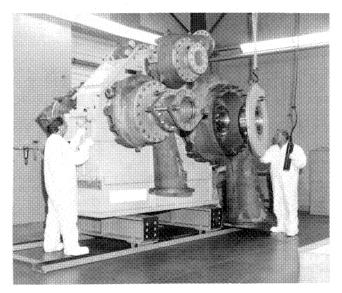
Assembly of an Oxygen Geartype Compressor in the Clean Room.
